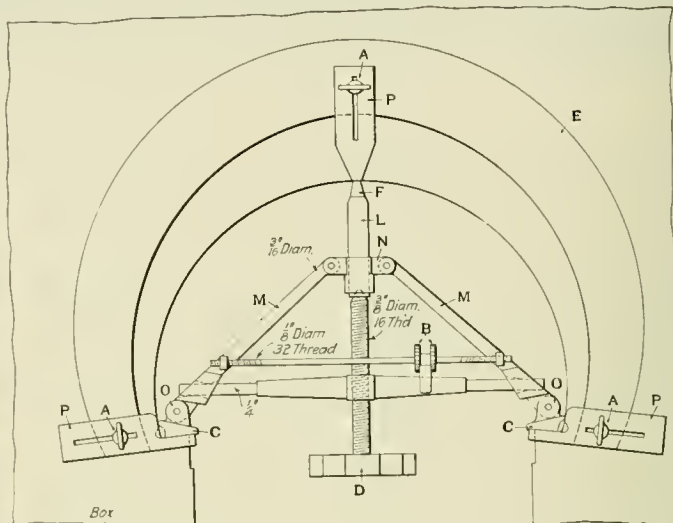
Caliper and Gage for Laying Out Shoulder Fit on Driving Box Brasses
